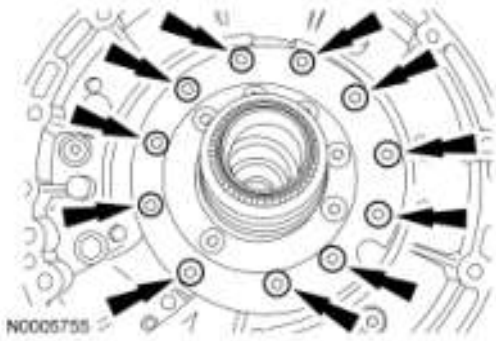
Locating Plate Assembly To Pump Body Bolts
